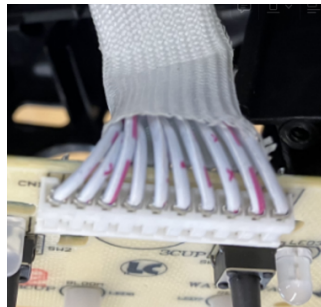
A flat ribbon cable. Parallel, evenly spaced wires. We can use this wire for the final product.
